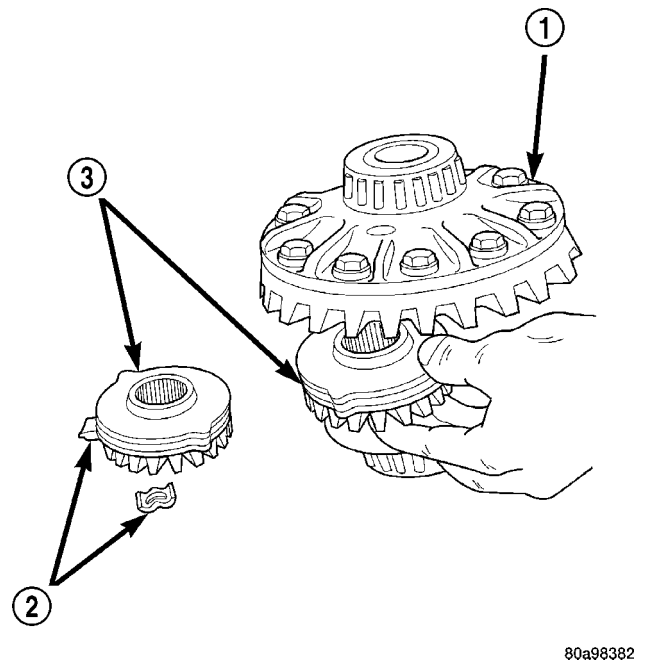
SIDE GEARS AND CLUTCH DISCS
